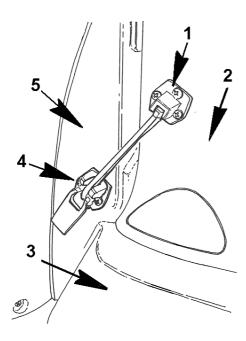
Hood Latch Assembly (Passenger Side Shown)
